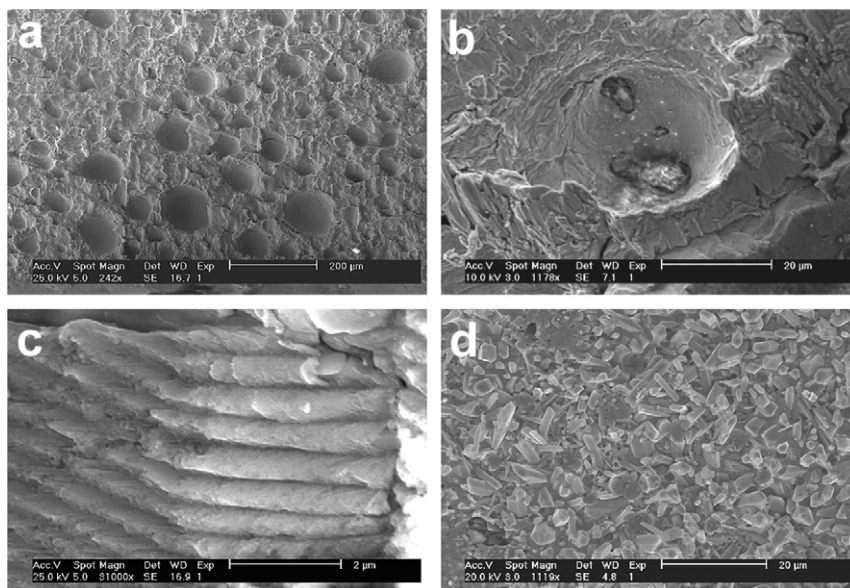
Fatigue fracture surfaces at the bonding interface: (a) dimples on solder side, (b) corresponding dimples on substrate side, (c) fatigue striations, (d) delamination surface on substrate side.
